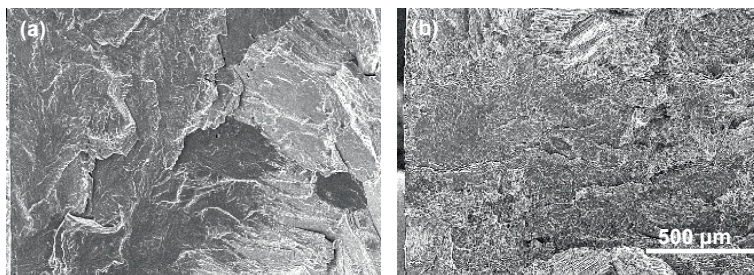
Fracture surfaces of the tensile samples broken at room temperature for alloy I (a) and alloy F (b); specimen surface left
